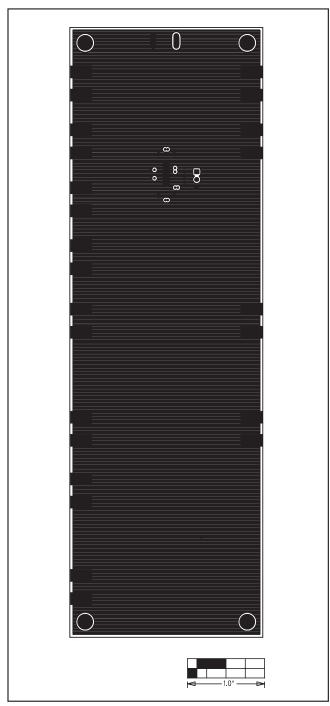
MAX4889B EV Kit PCB Layout—Solder Side
